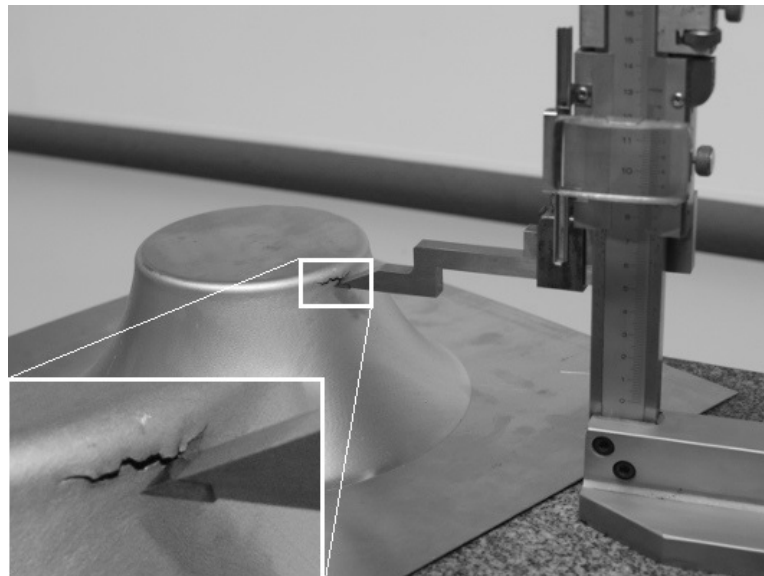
Height gauge measuring the lowest point of fracture on a VWACF part. Inset: detail of crack and gauge tip.
